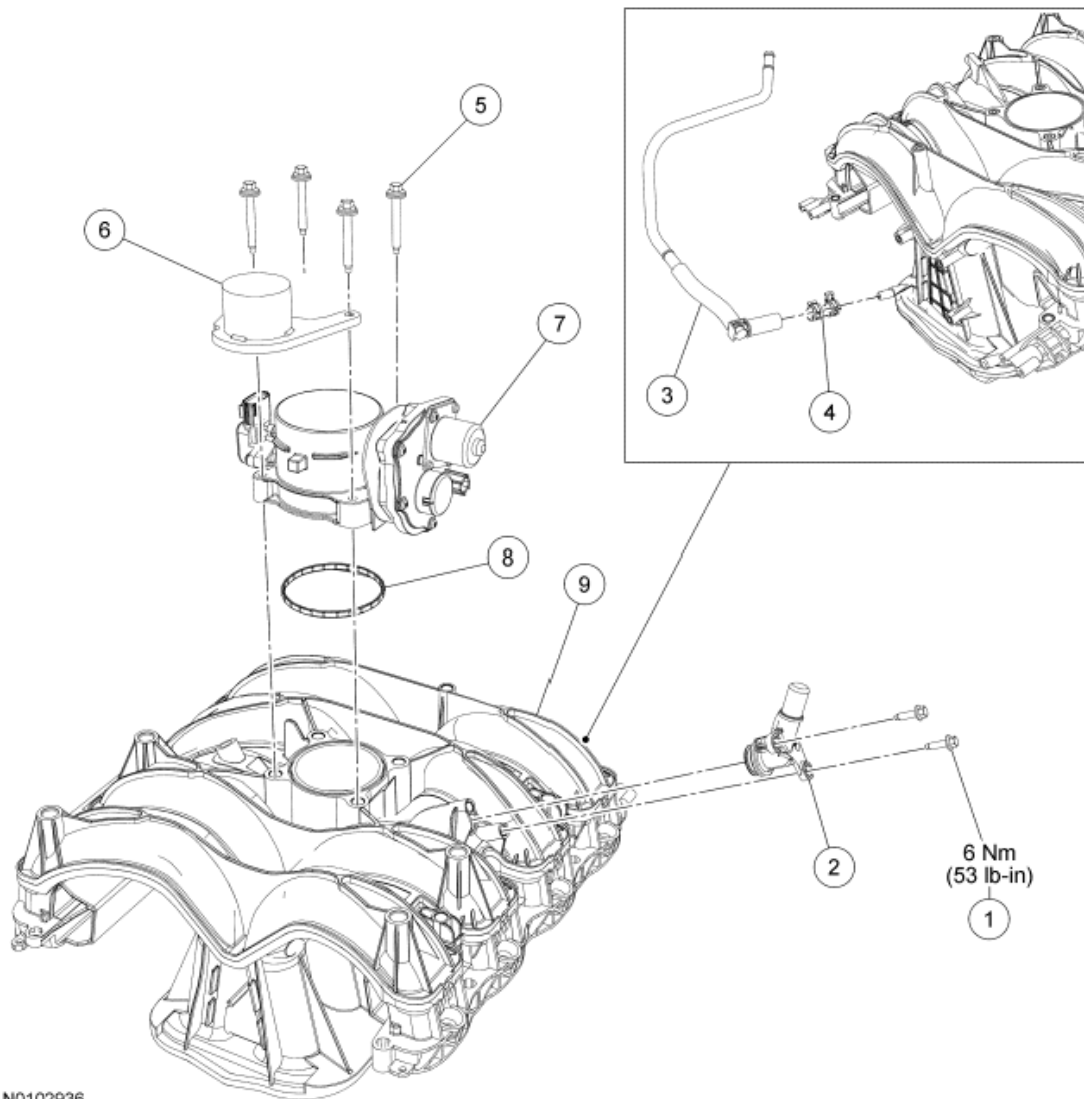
Identifying Intake Manifold Vacuum Tube, Throttle Body And Intake Manifold Components With Torque Specifications
